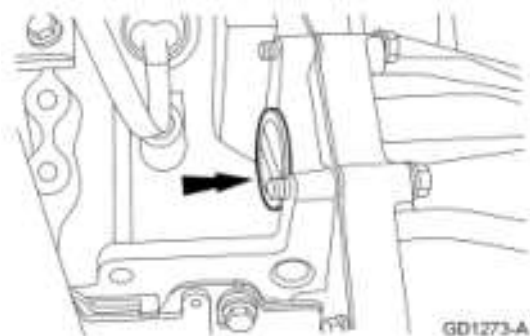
Installing Transmission Cooler Tube Support Bracket Nut
